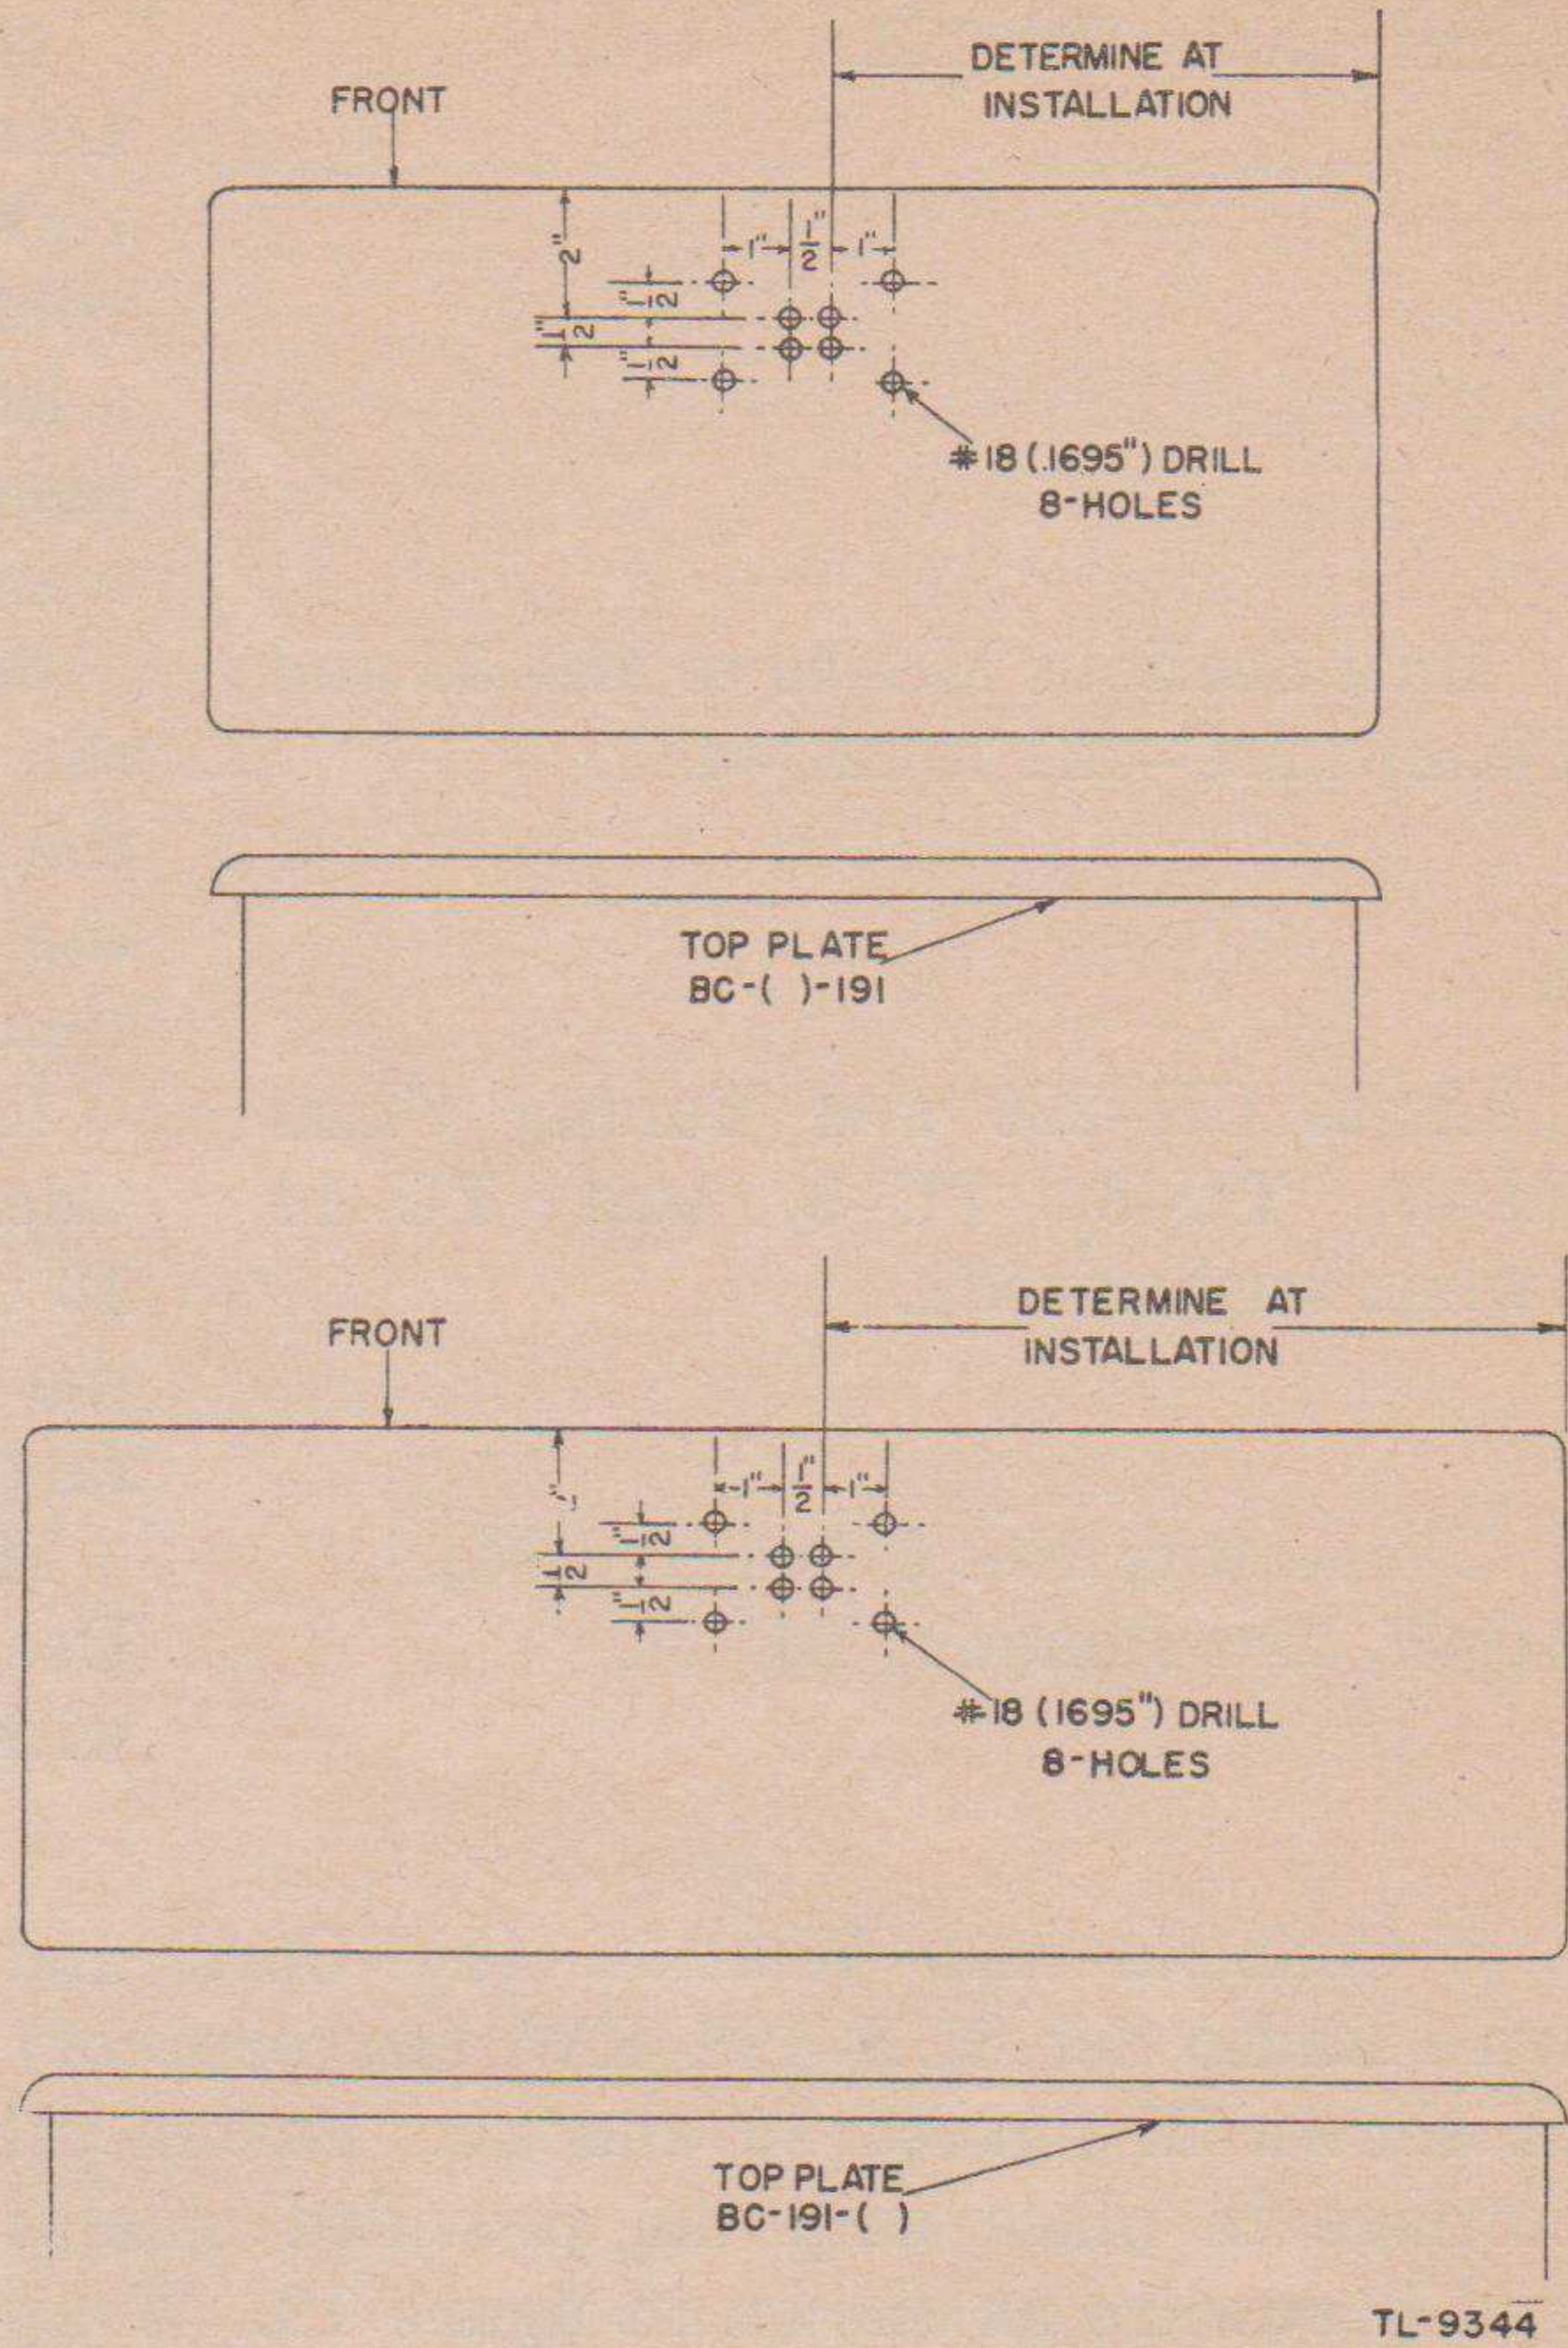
Drilling cabinet of Radio Transmitter BC-191- ( ) for Mounting FT-172.
